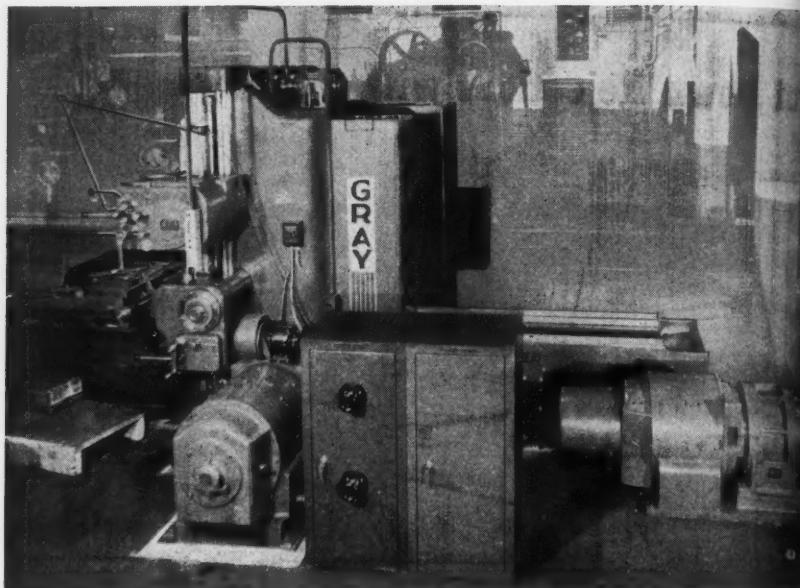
G. A. Gray Double-Housing Planer, 42 x 42 x 12 Feet, Driven by G-E 35 H.P. Variable Voltage Planer Drive with Speed Range of 40 to 1,200 R.P.M. on Motor, Giving 8 to 240 Feet per Minute Platen Speed
